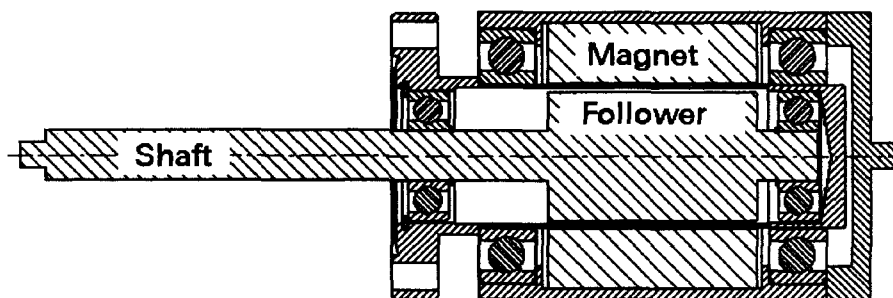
Magnetically coupled UHV feedthrough mounted on a ConFlat flange. An external, rotating magnet couples torque through the stainless steel vacuum wall to a magnetic follower and shaft within the vacuum chamber. Reprinted with permission from Veeco, St. Paul Division, 4900 Constellation Drive, St. Paul, MN 55127.
